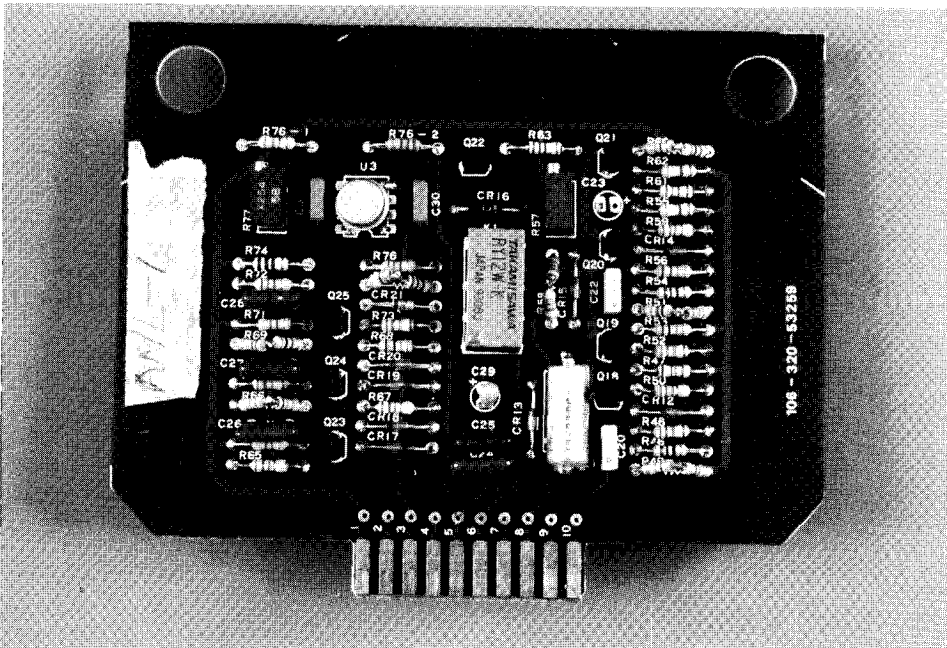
Pre Amp and Hardlimiter PCB (CH1)
